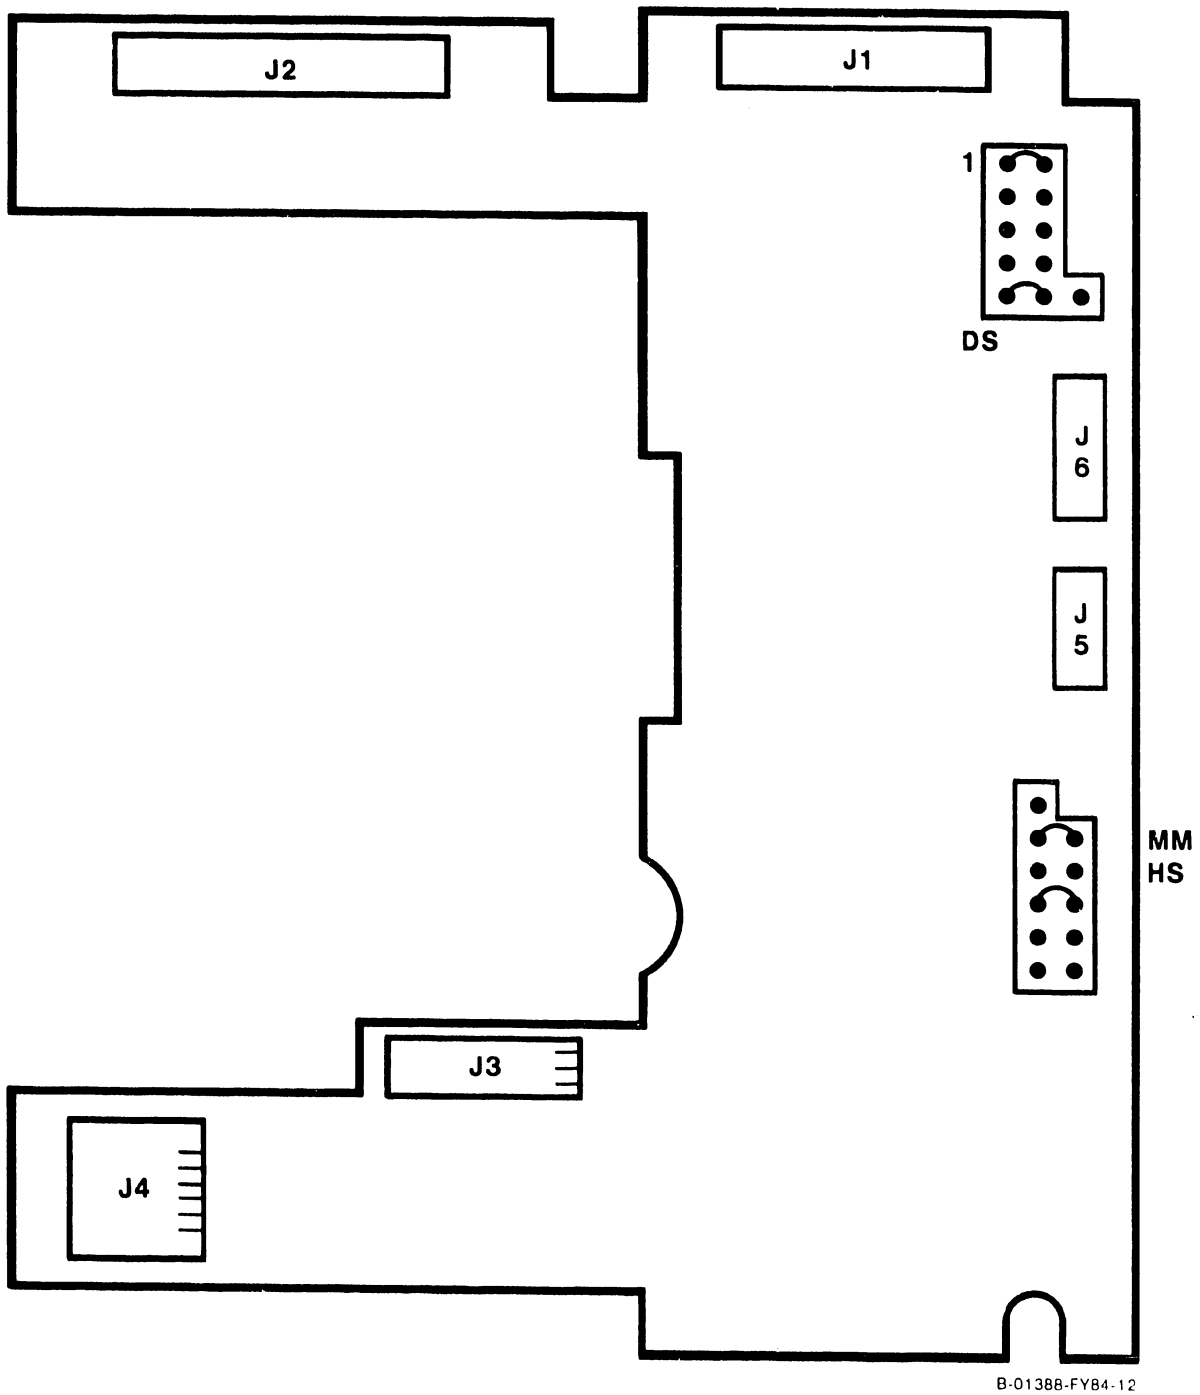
SA455 Diskette Drive PC Board Jumpers
